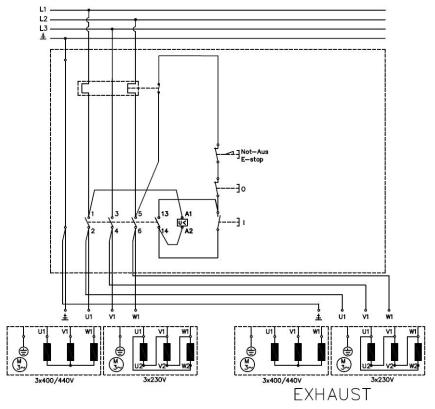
Diagram of belt grinder with exhaustmotor.
